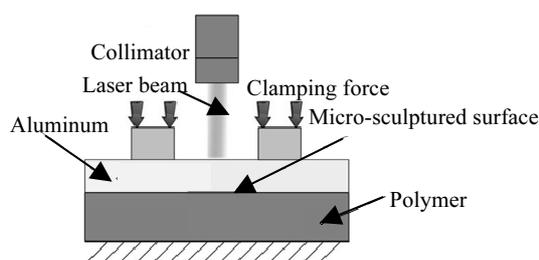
Schematic diagram of the laser welding setup^[55]
